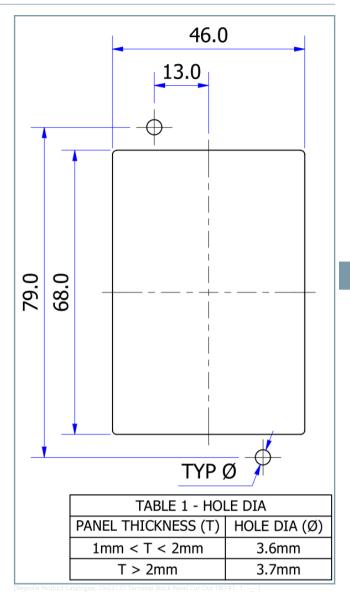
/84 Panel Cut-Out For Flush Mounting Terminal Block Type TBD-R1 Base
